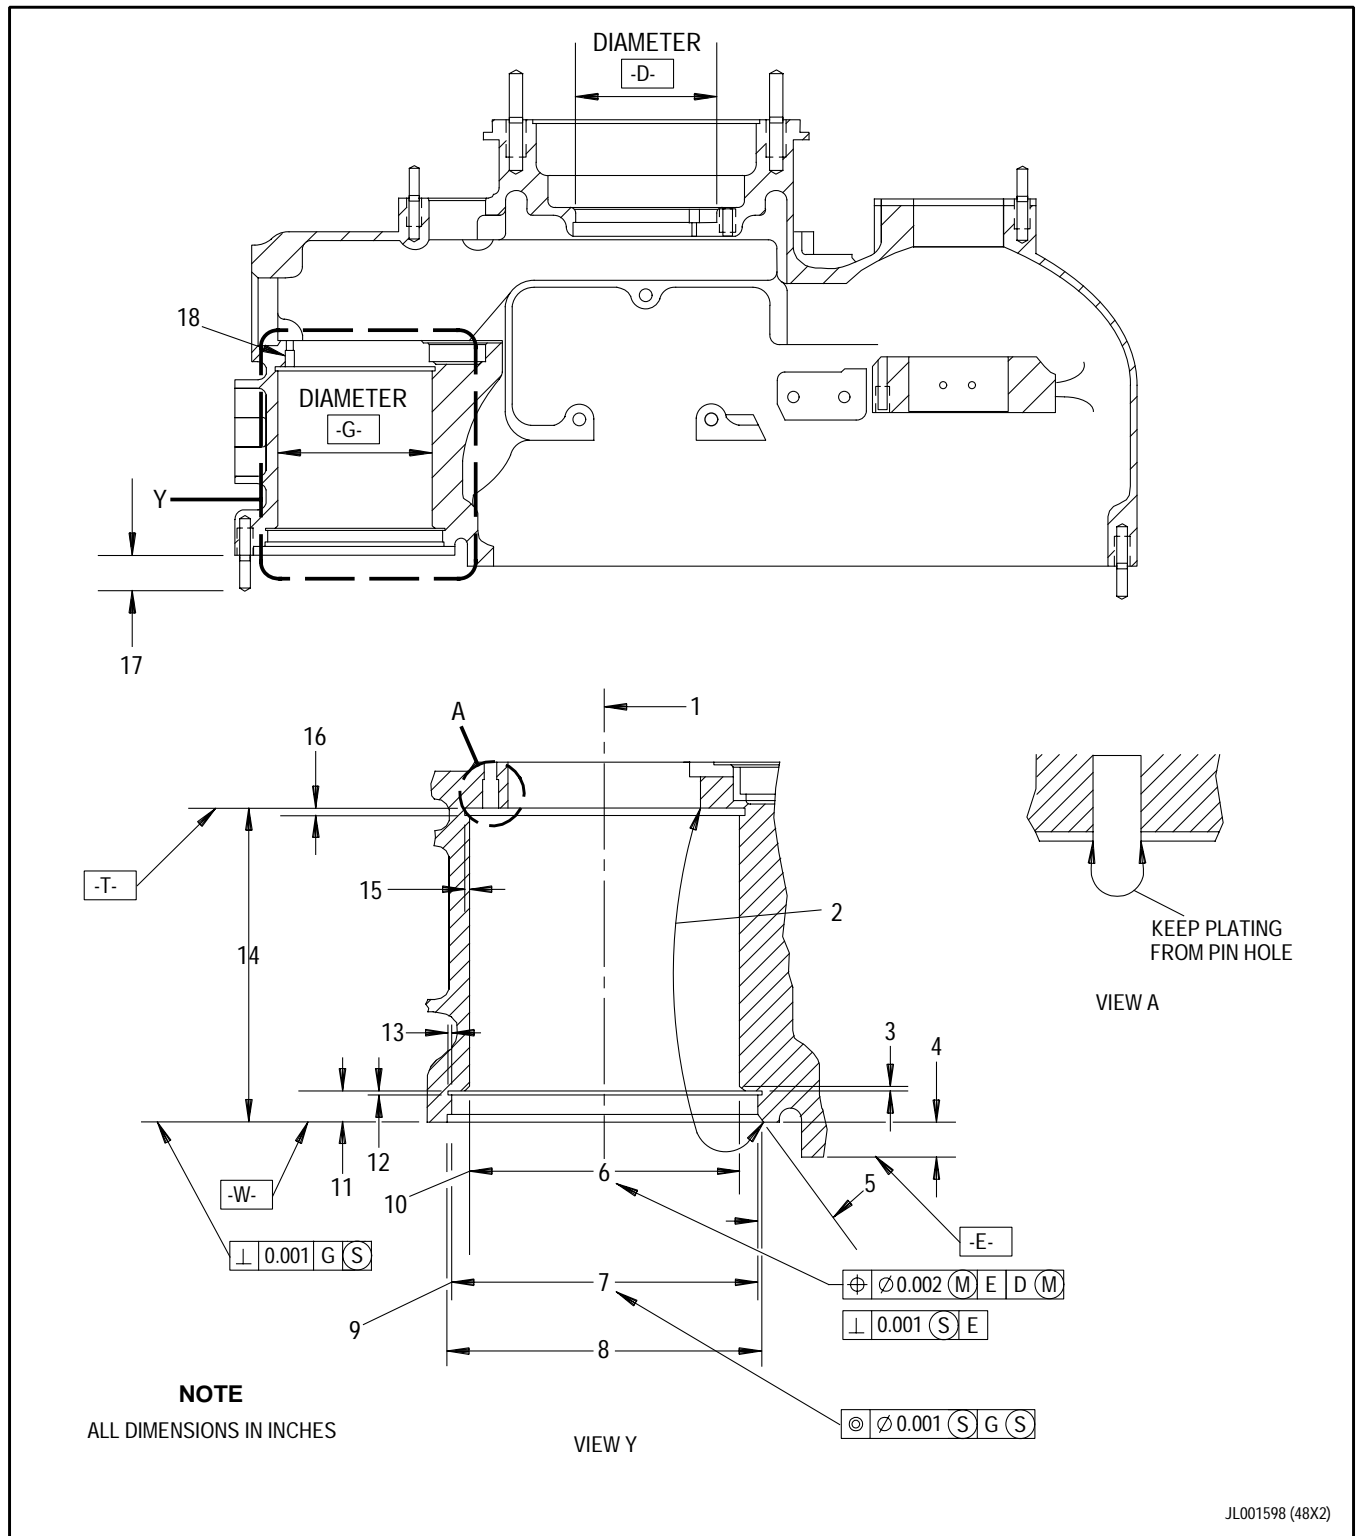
Gearbox (Rear) Housing Assembly - Main (Oil Scavenge) Pump Cavity Aluminum Hardcoating
